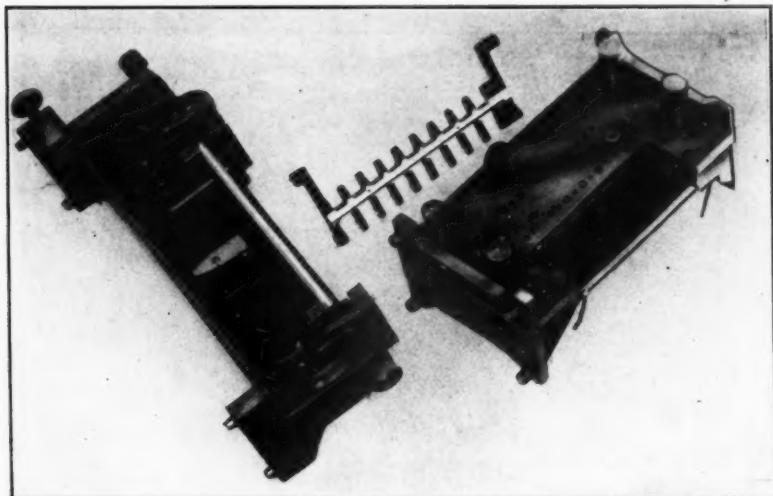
ASSEMBLING DRILL JIG AND DRILL JIG FOR A 48 AND 48 A
